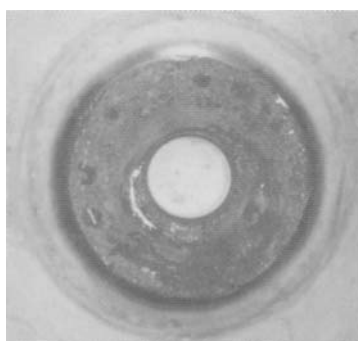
Crevice corrosion along valve bellows and flange gap.
